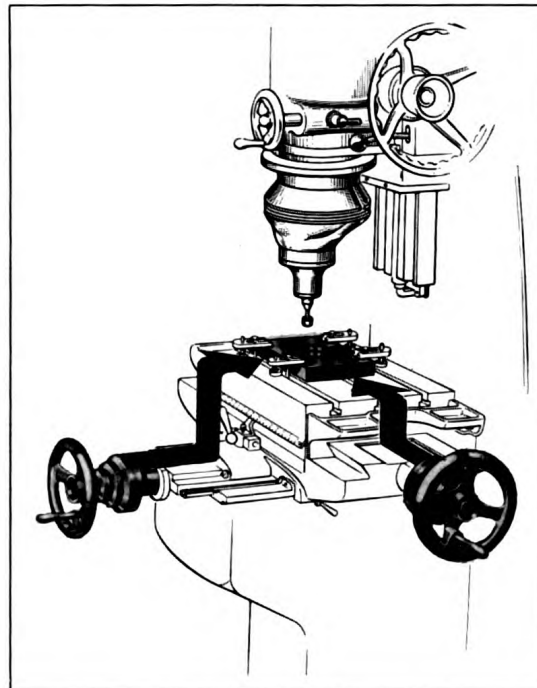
The machine represents the physical embodiment of the coordinate system.
